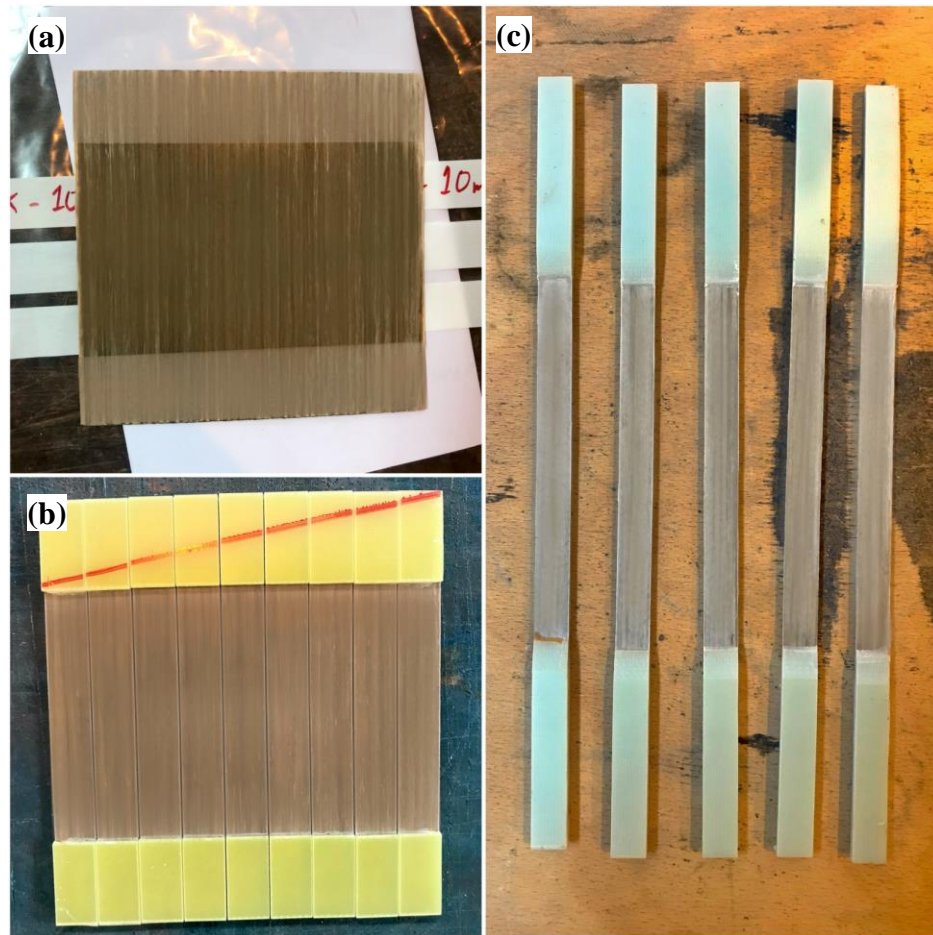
Fabrication of tensile coupons: (a) keyed laminate, (b) tabbed laminate and (c) cut tensile specimens.
